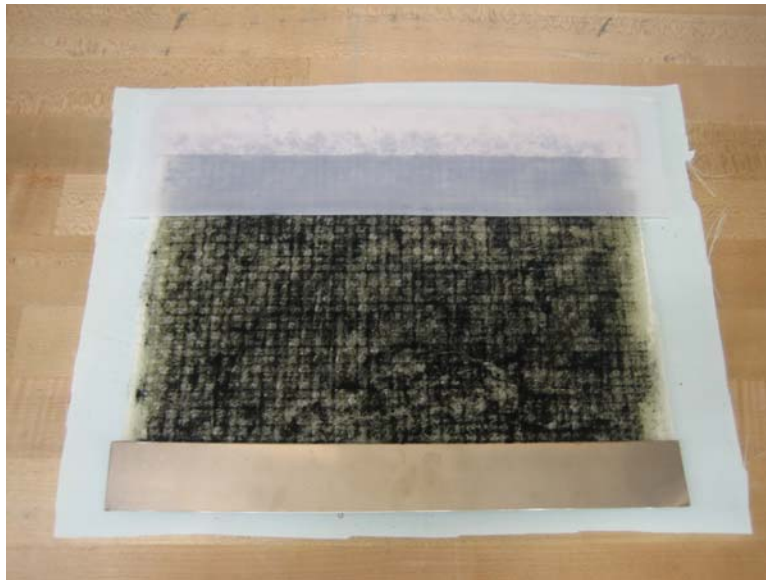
Teflon Layer Used to Build Initial Crack in Sample
